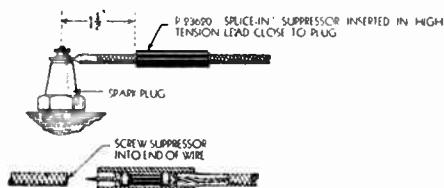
Method of Attaching "Splice-In" Suppressors.
